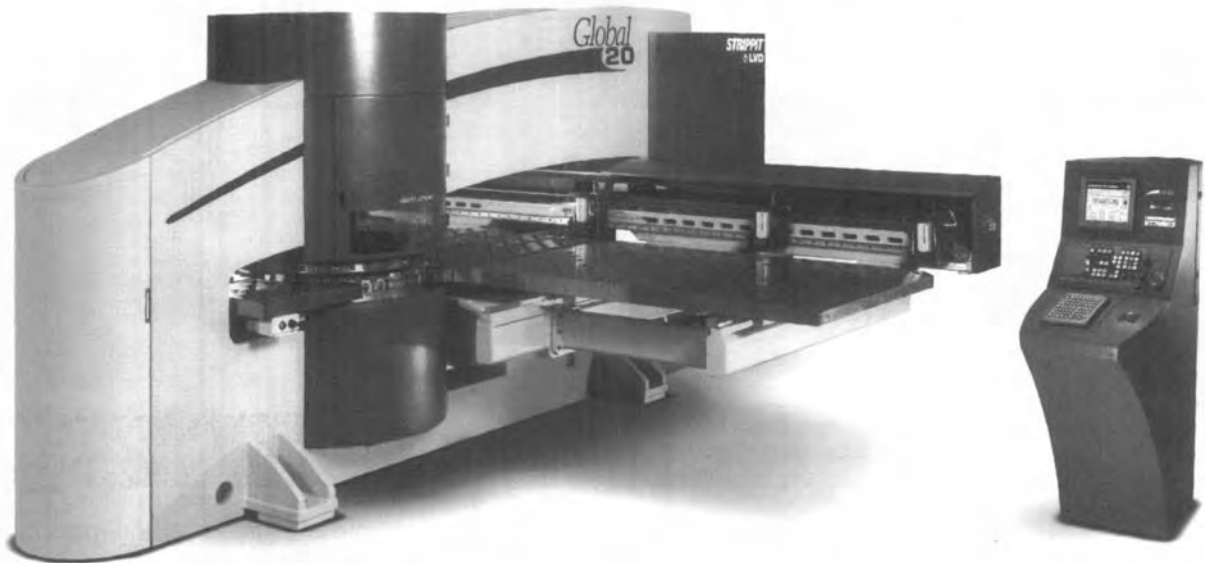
C5a A CNC turret punching machine. Movement of the sheet, changes in punches and dies through rotation of the turret, and the punching action, are all controlled automatically. (Courtesy Strippit LVD, Akron, New York.)
